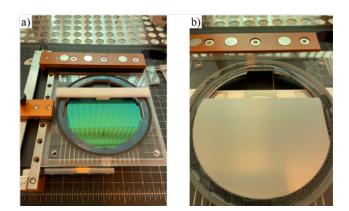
Front view (a) and back view (b) of wafer fixed by the magnetic holder.
